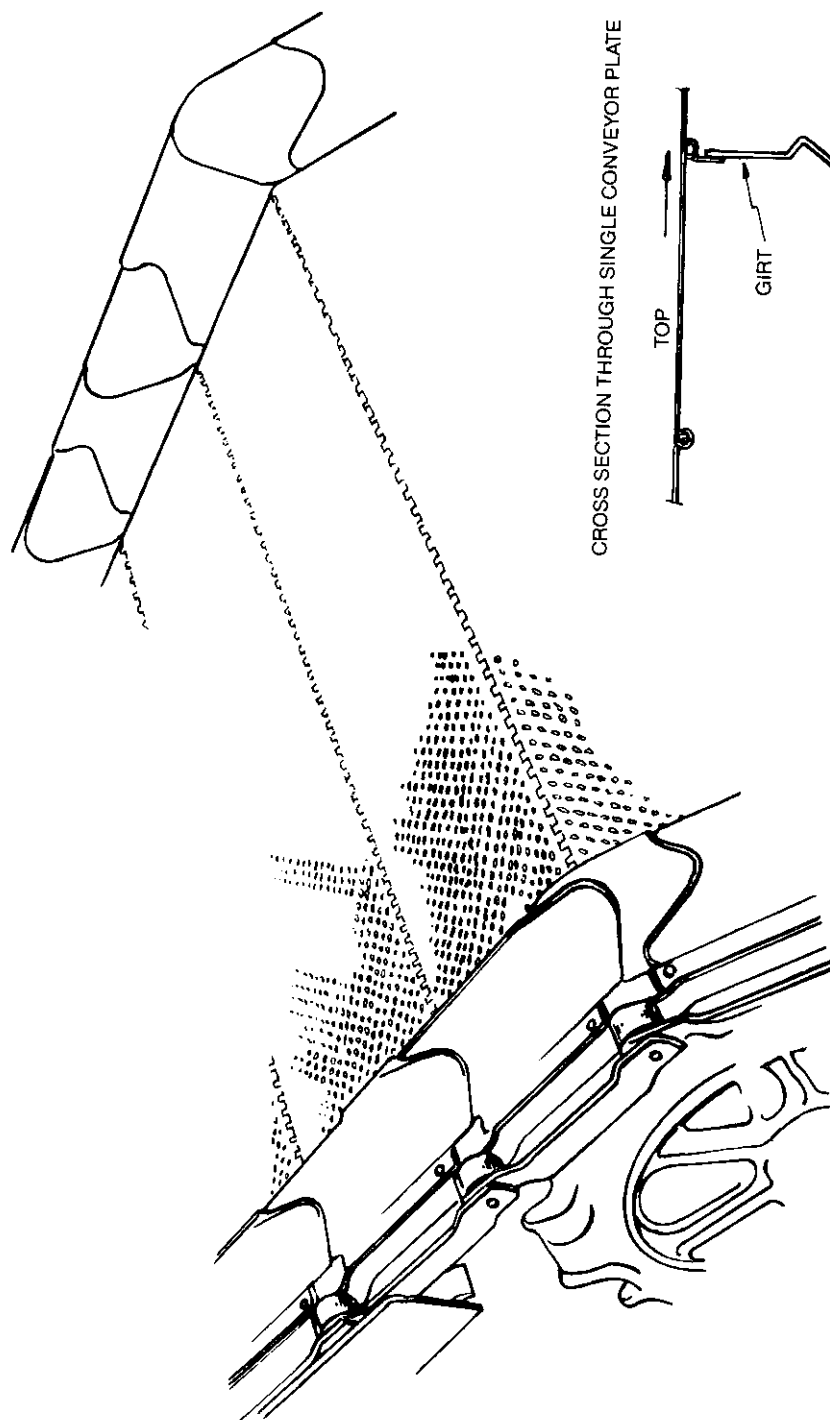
Construction details of typical dryer conveyor (courtesy Proctor & Schwartz, Ltd.).
